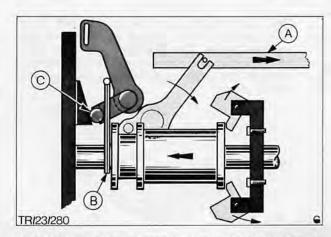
Throttle and governor assembly during full throttle and high engine revs
